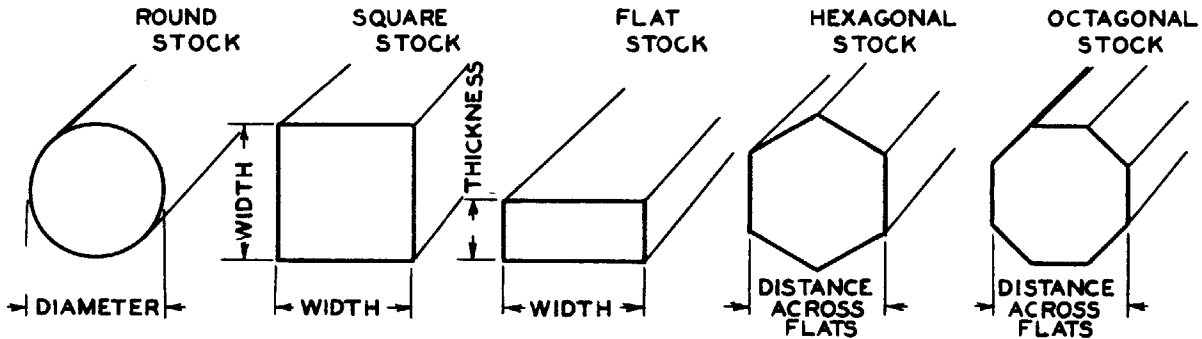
DIMENSIONS USED IN MEASURING BAR STOCK
